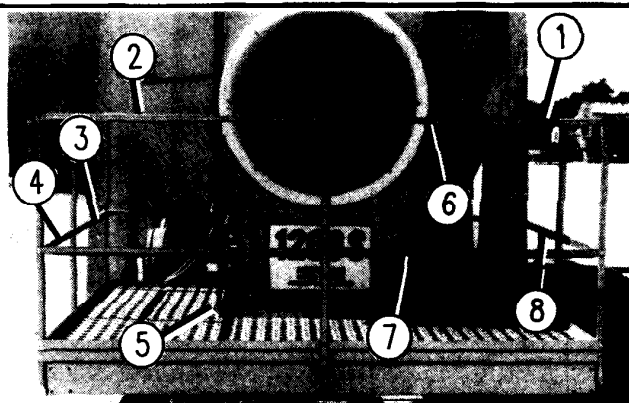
TOE BOARD ANGLES AND GUARD RAIL PARTS
